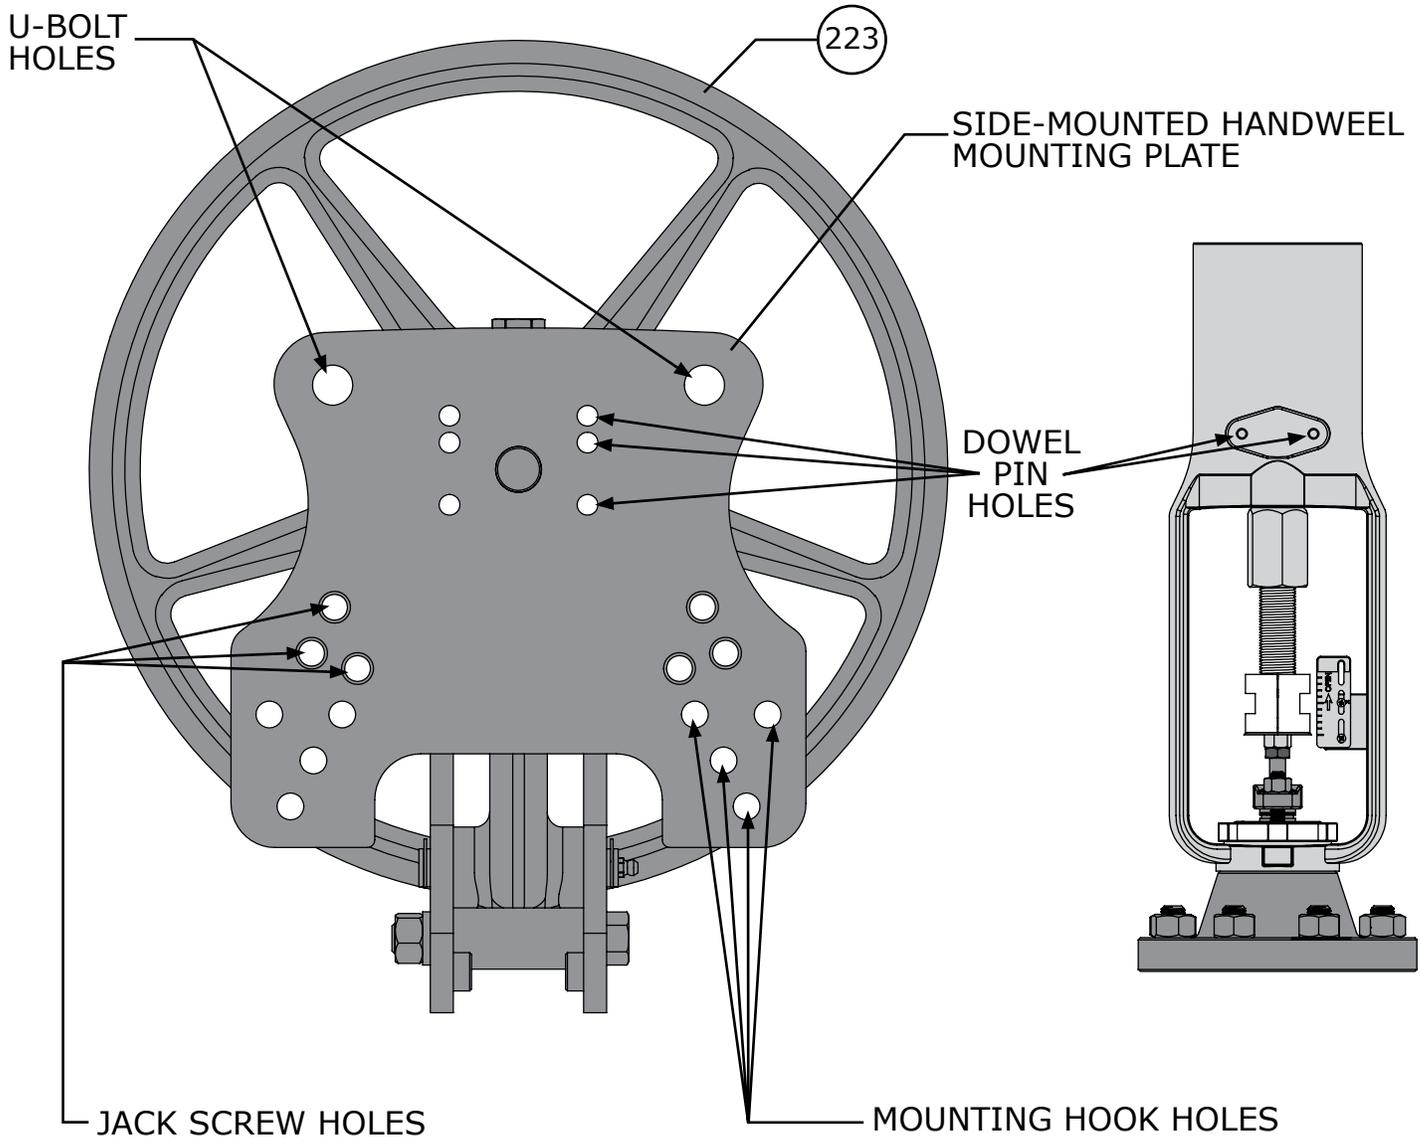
Side-Mounted Handwheel Mounting Hole Diagram
